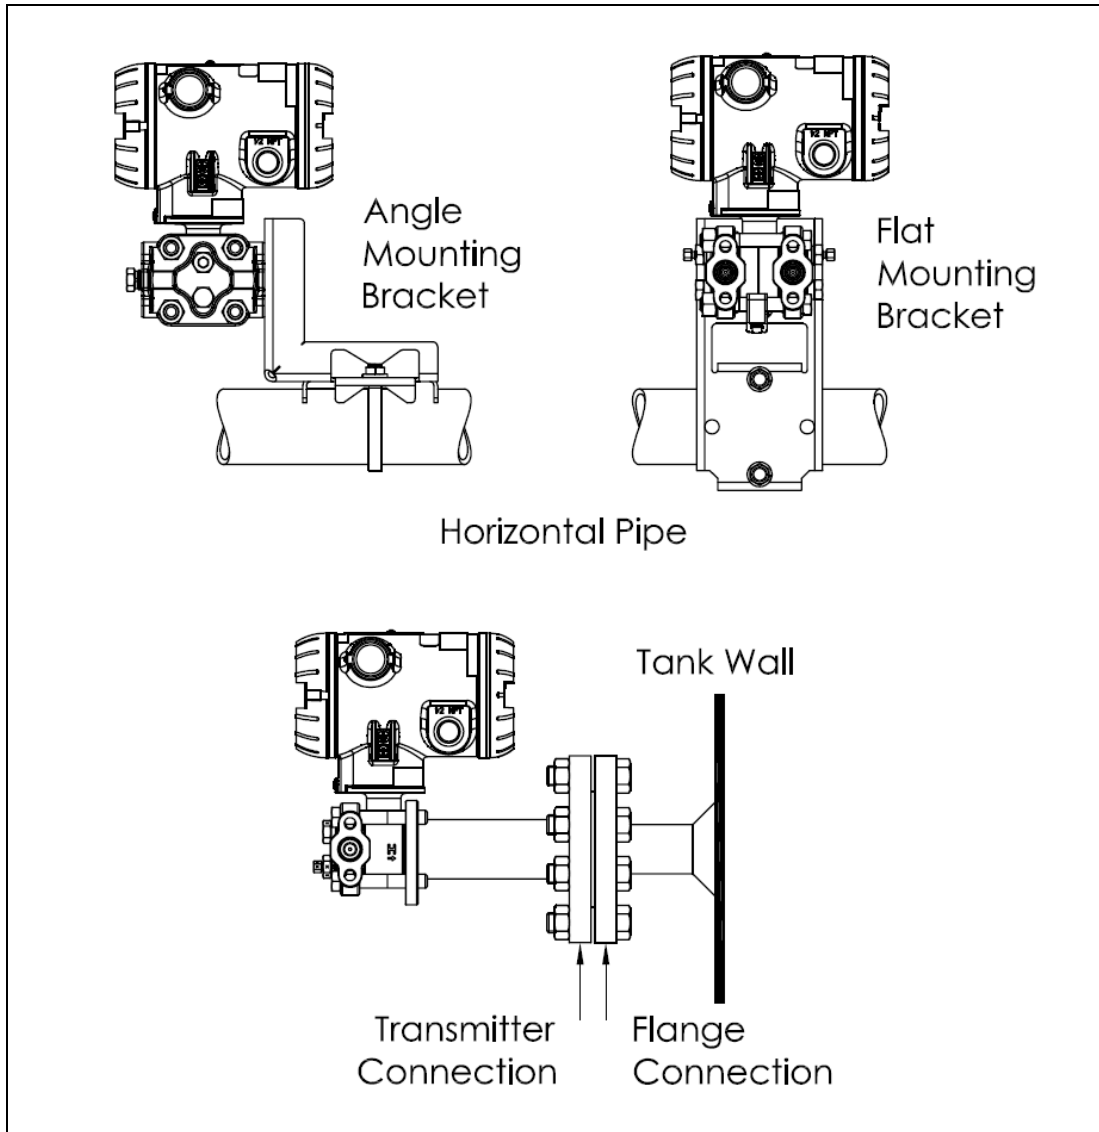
Typical Bracket Mounted and Flange Mounted Installations
